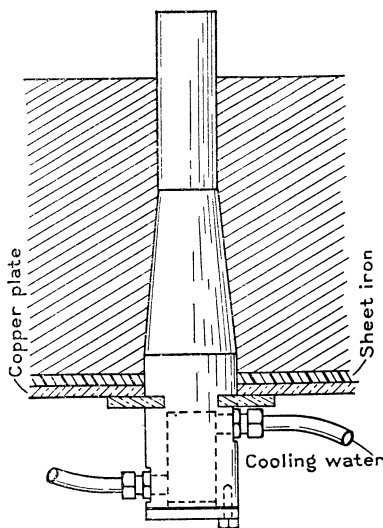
Section of water-cooled steel electrode used in Girod furnace.
